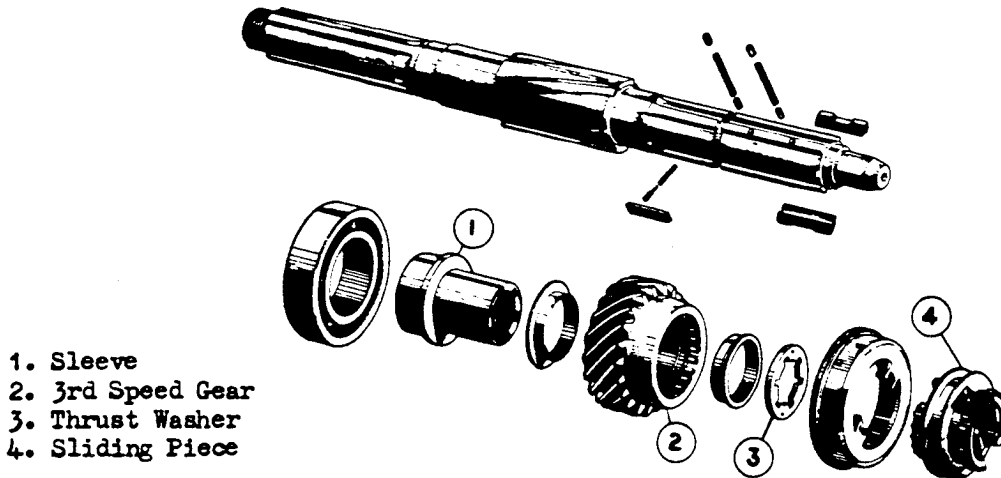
THIRD MOTION SHAFT RG.5469 AND COMPONENTS.
